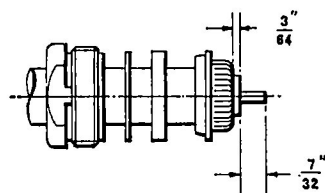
F—Assembly instructions—C Type plugs and sockets—Elbow plugs—Captive contact
